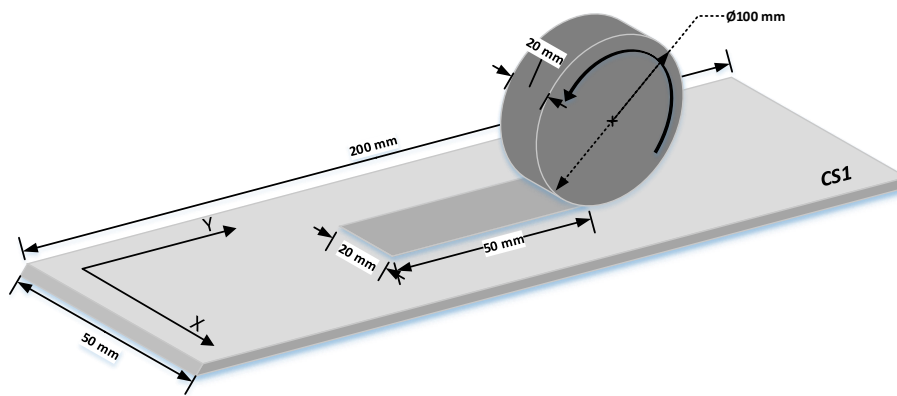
Single surface rolling process schematic with dimensions of sample and roller
